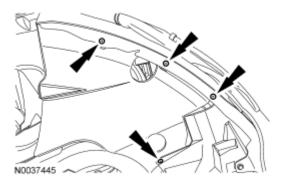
Locating RH Fender Splash Shield Screws Courtesy of FORD MOTOR CO.
